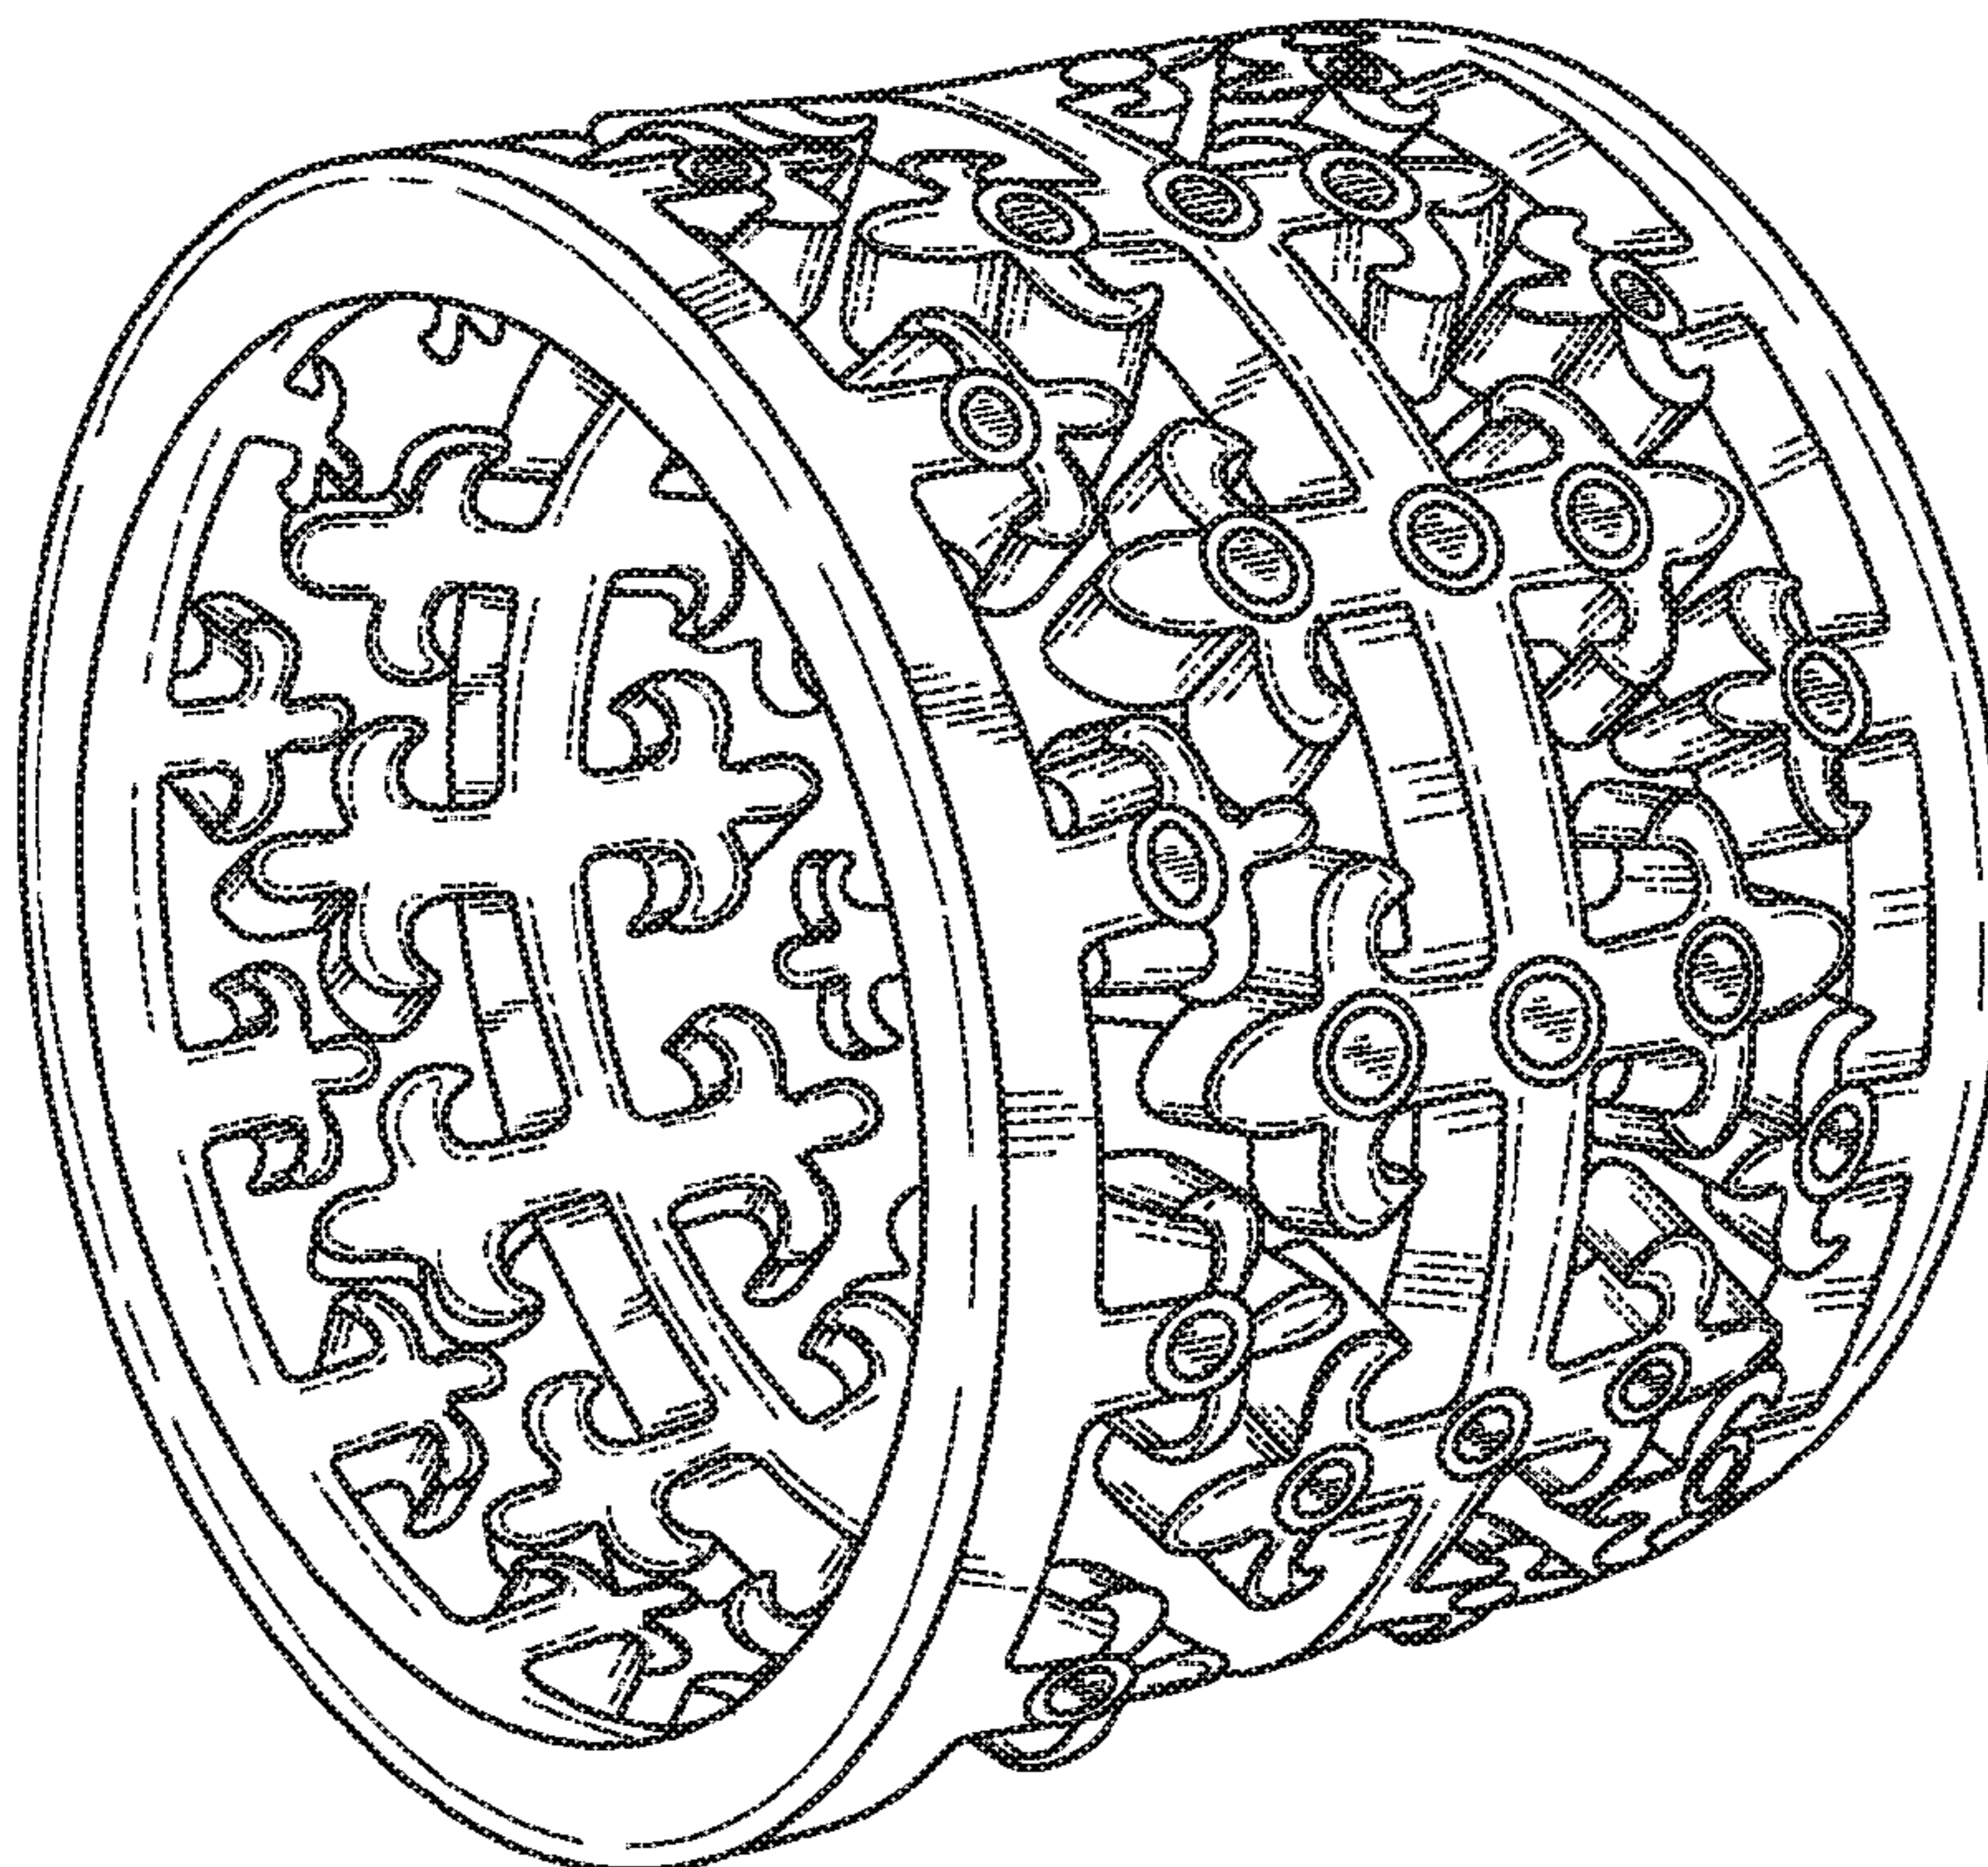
is a side perspective view of a second component unit of the ring, shown separately for completeness of illustration.
